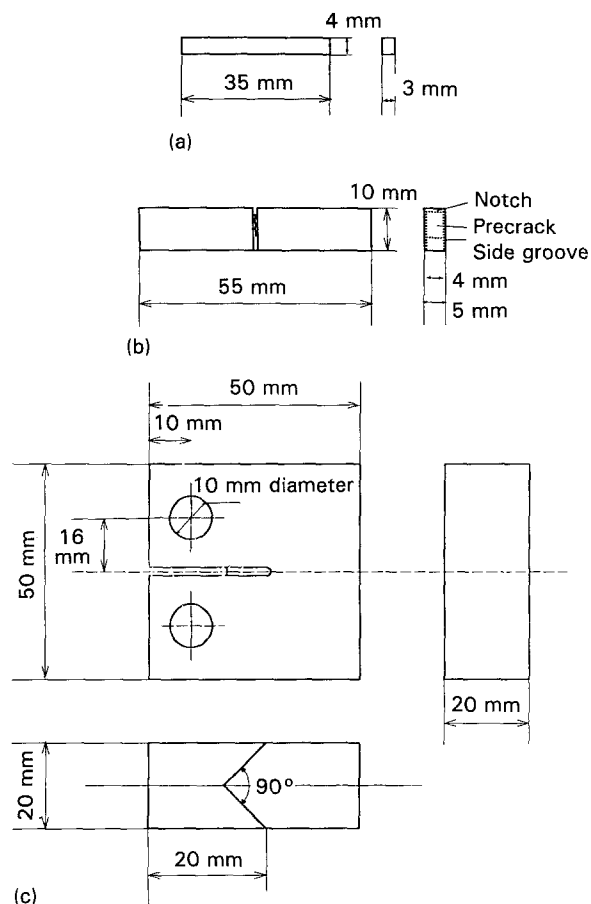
Geometry of test specimens. (a) Three-point bend specimen; (b) side-grooved toughness specimen; (c) chevron-notched CT specimen.
